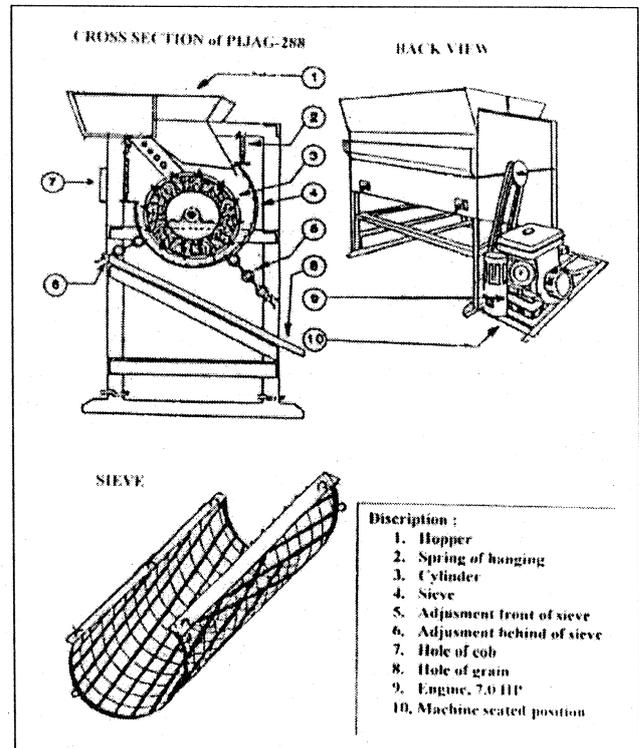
Cross section, back view and sieve of PIJAG-288 corn-shelter
